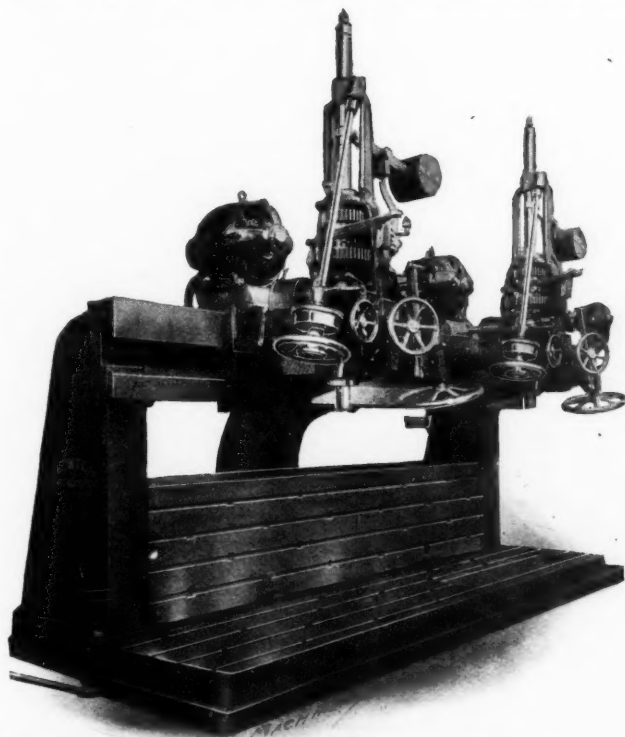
Front View of Newton Locomotive Frame Drilling Machine, with Work-tables run back to expose Floor Plate
